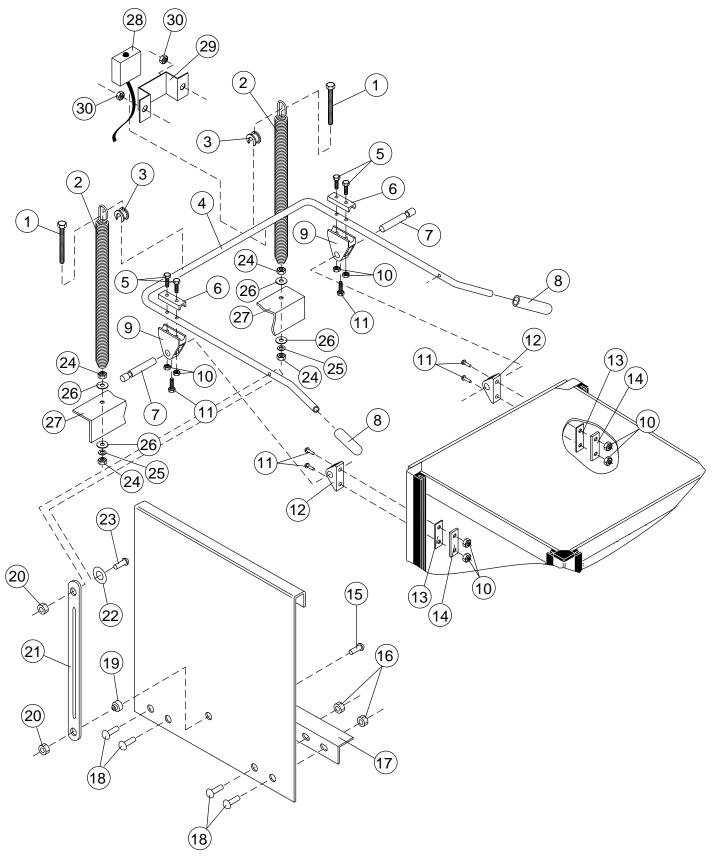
MH-60/6N/6L Door Handle, Spring Assembly, and Safety Switch
